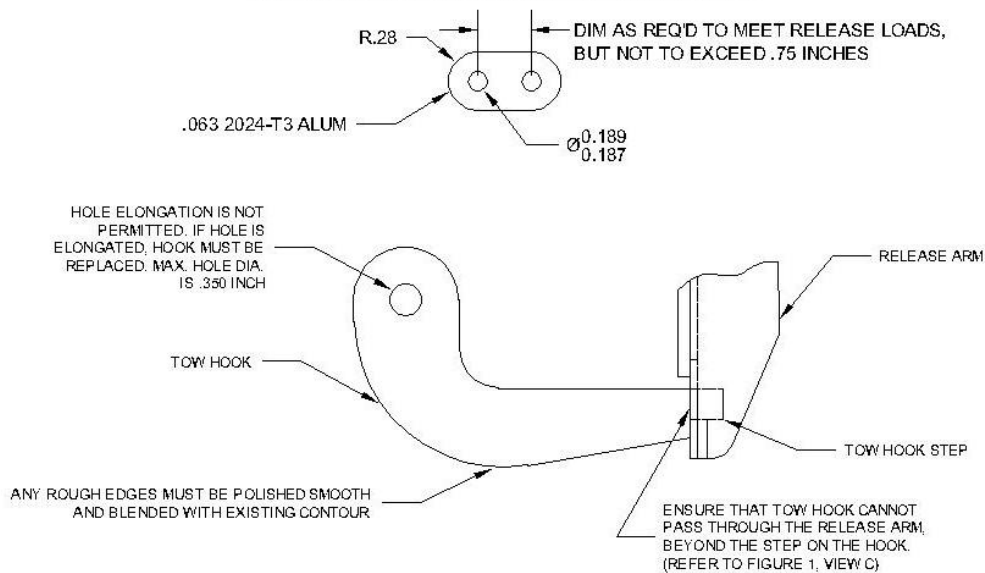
PULL TEST OF TOW RELEASE ASSEMBLY
